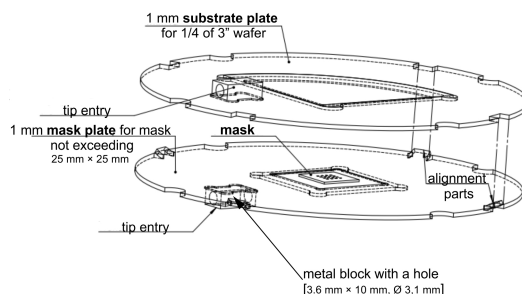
Technical drawing of mask and substrate plates, after [88].
